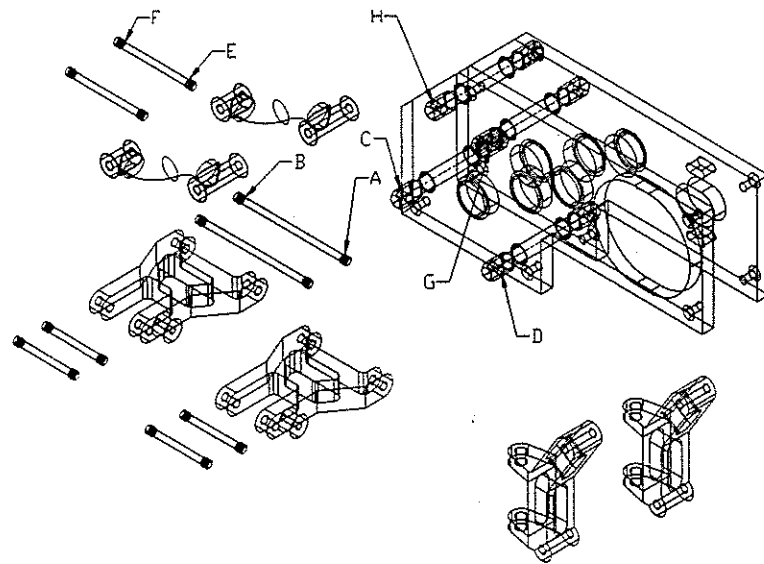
Suspension hinge pins and front mounting plates assembled
